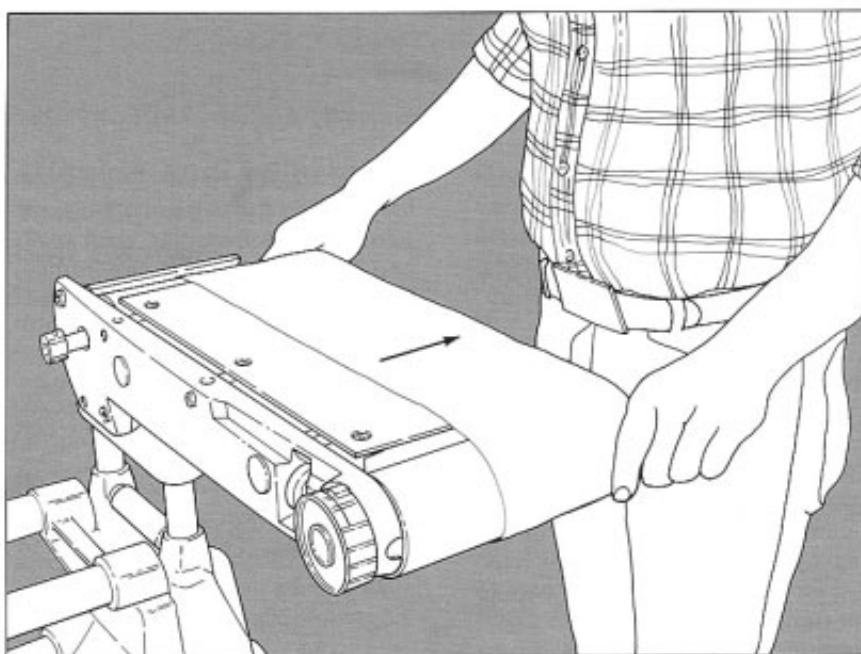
To remove a belt, slide it over the drums and off the right side of the belt sander.
